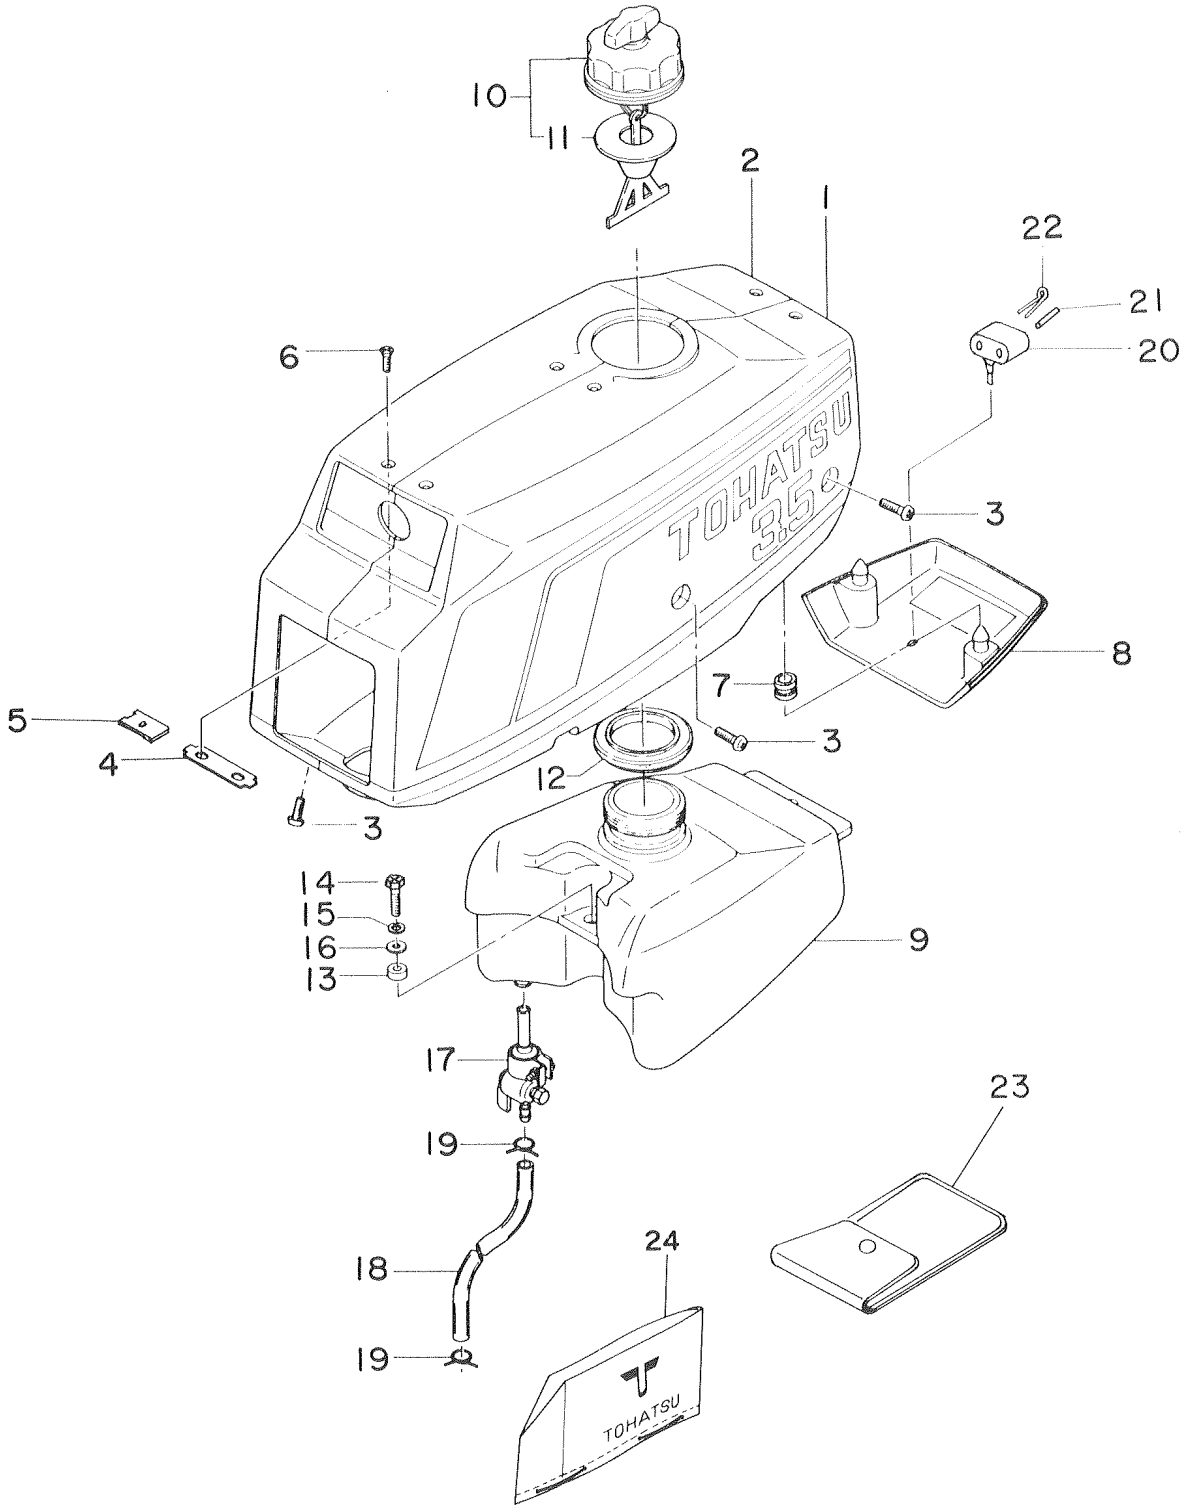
A MOTOR COVER & INTEGRAL FUEL TANK
